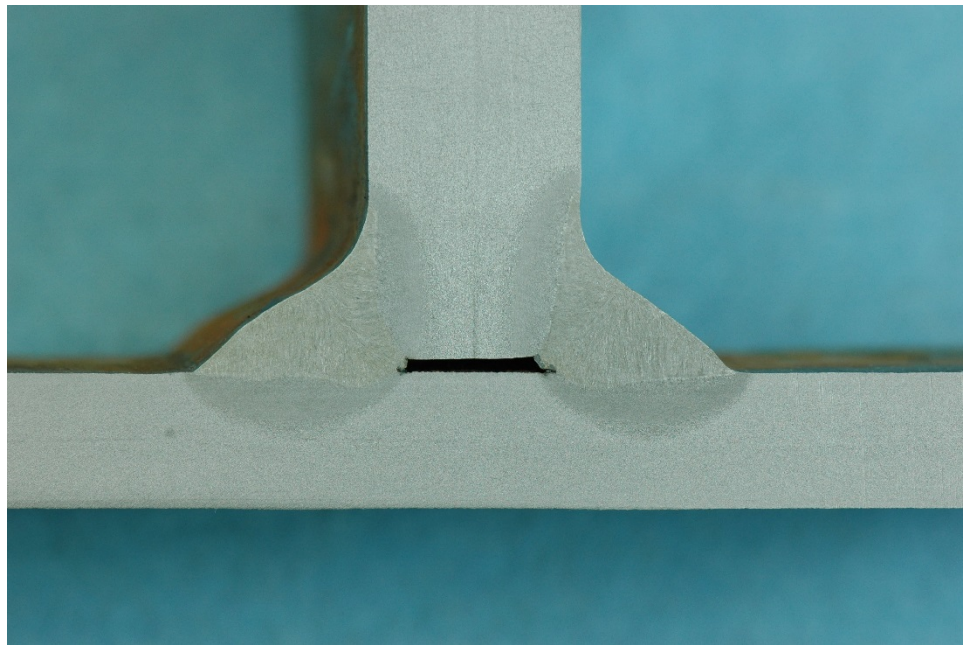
A typical macro-etched section of rib-to-floor beam weld in MU1
